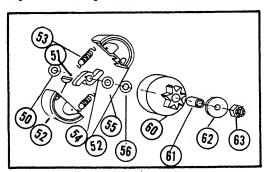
CLUTCH AND SPROCKET ASSEMBLY. (Reference numbers shown on Legend, Figure 29.)
